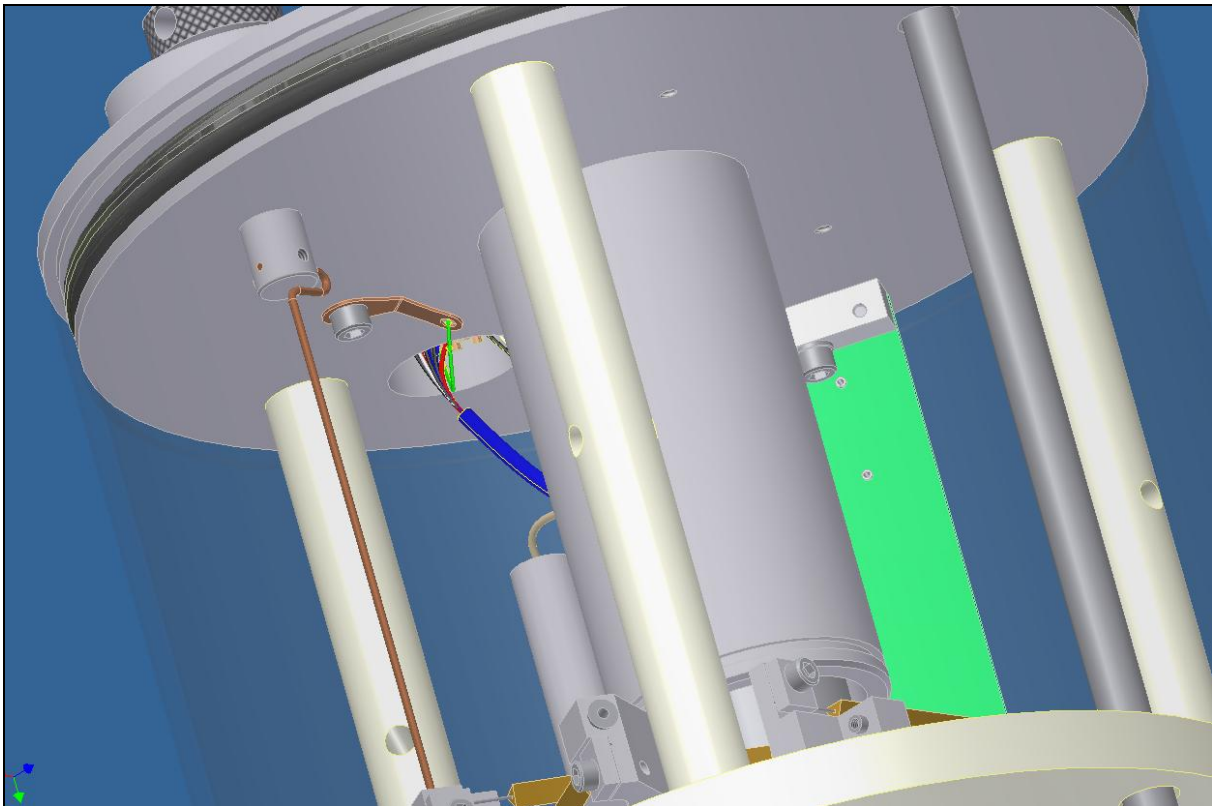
Inside Front View of GS-13LH Showing Top End of Spring Assembly (now Removed).
